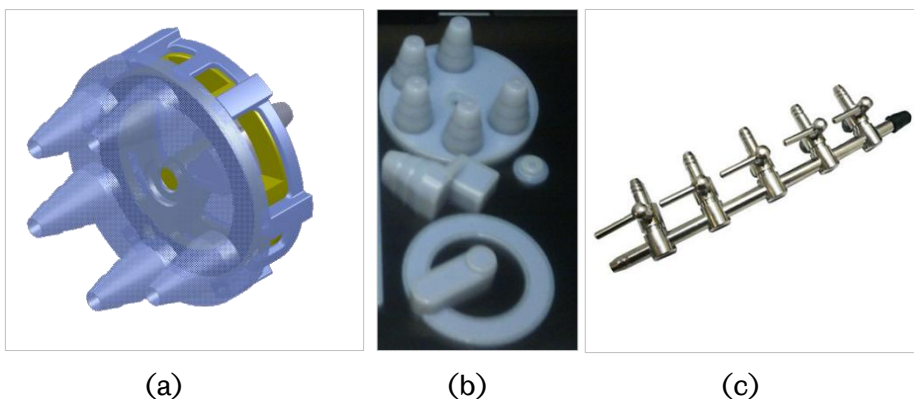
Pulse rig manifold (a) SolidWorks design, (b) printed parts, (c) 5-way aquarium air switch
